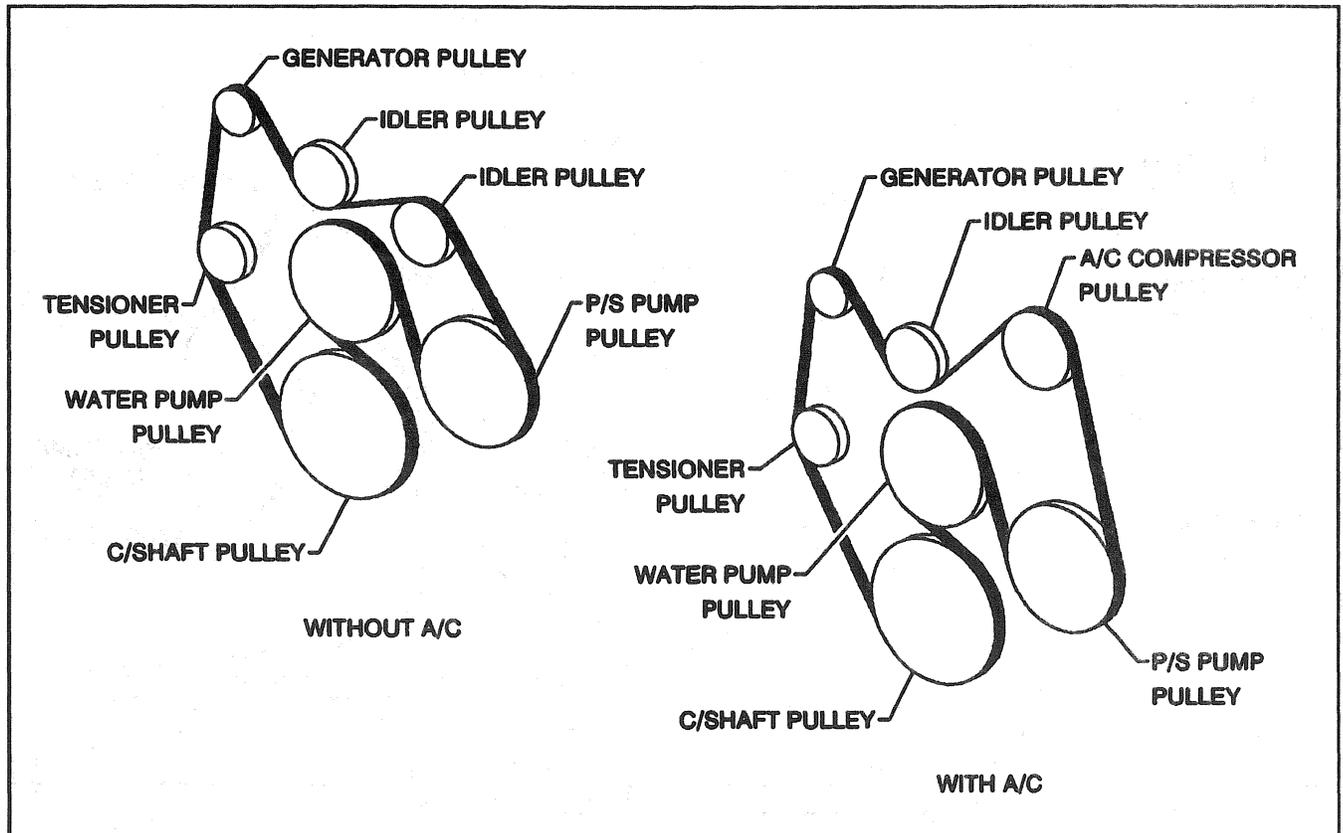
Multiple Rib Drive Belt Routing (4.3L, 5.0L, and 5.7L Engines)
